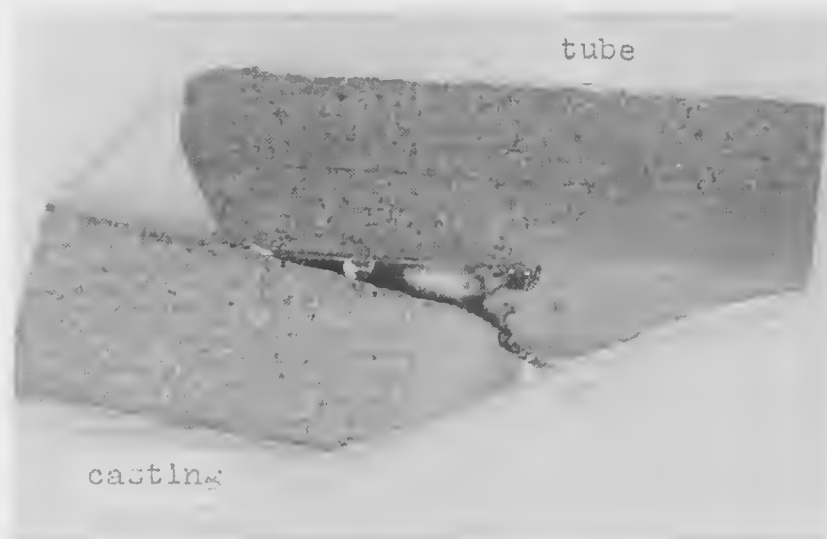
Section of joint between tube and casting, showing weld deposit, heat affected zones and low weld penetration. 2% Nital etch. 4.5 X
